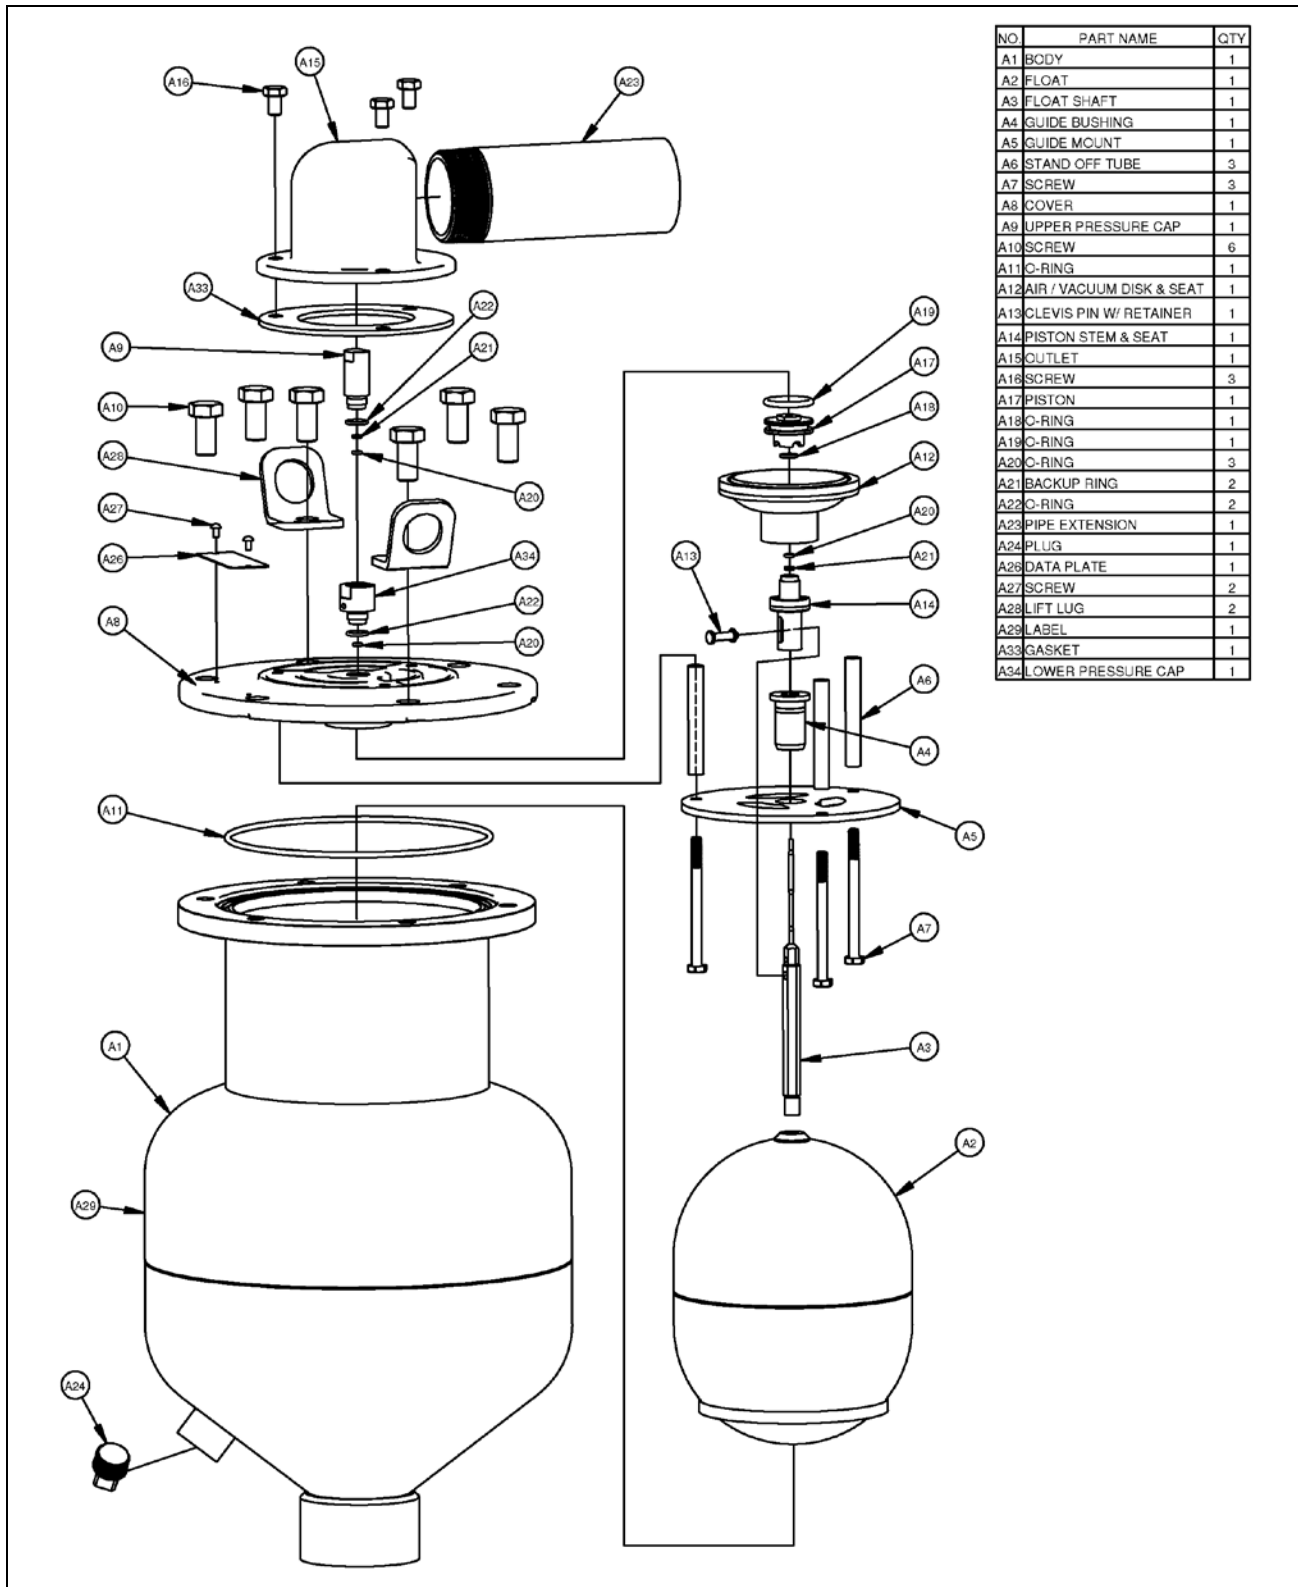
ASU-CAV Combination Air Valve Part Identification (Exploded View)
